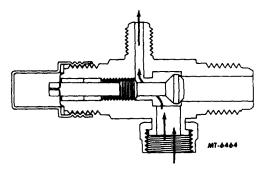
Service Valve Positioned to Close Refrigerant Line and Discharge Compressor Only
